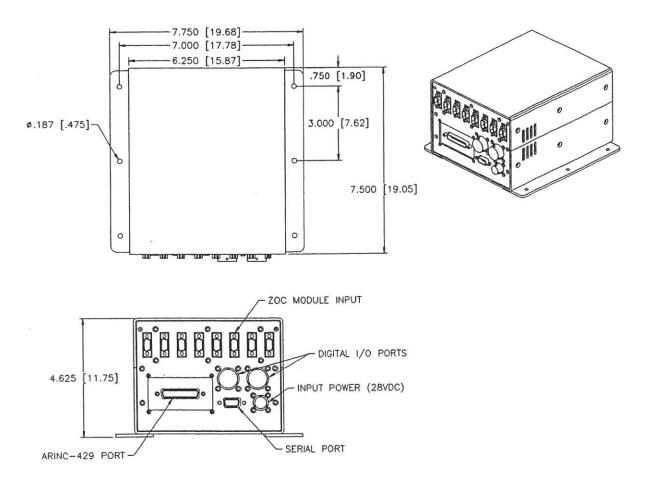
DSM Physical Measurements and Mounting Dimensions
